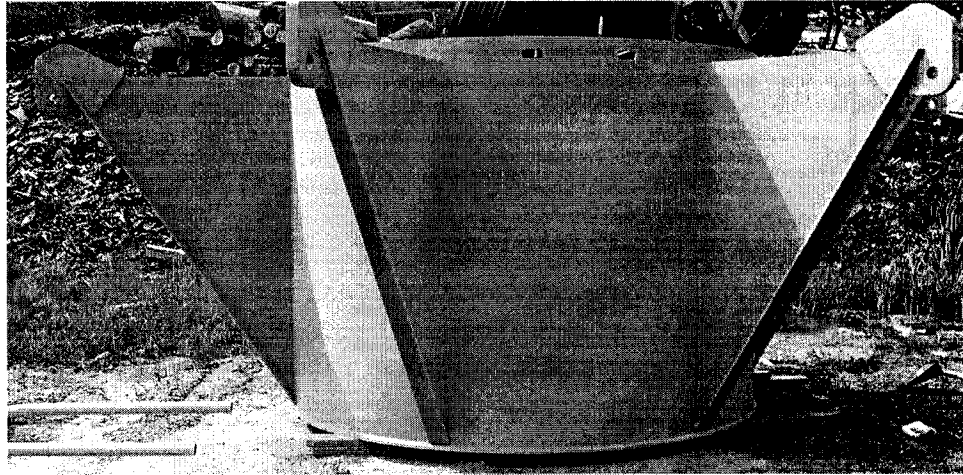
Ballast Can after complete welding and painting.
